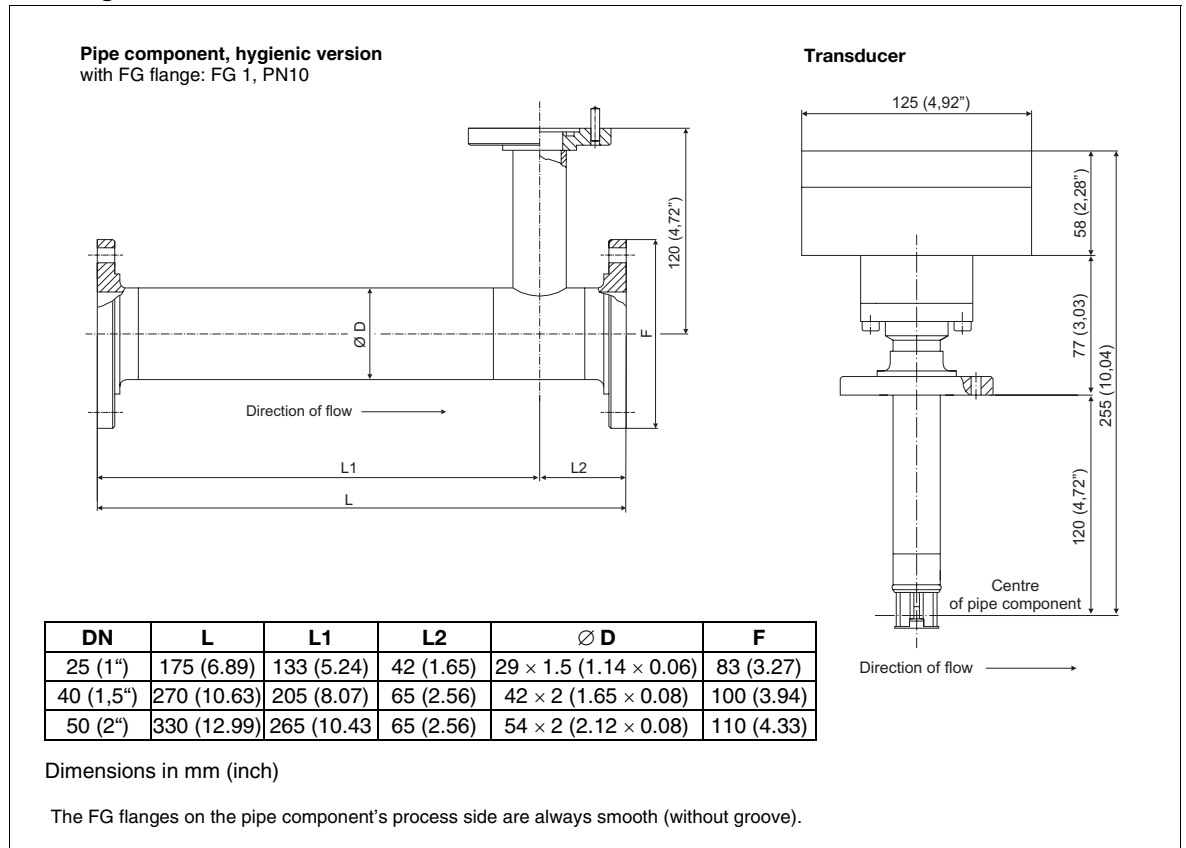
Dimensional drawings Hygienic version with FG flange
